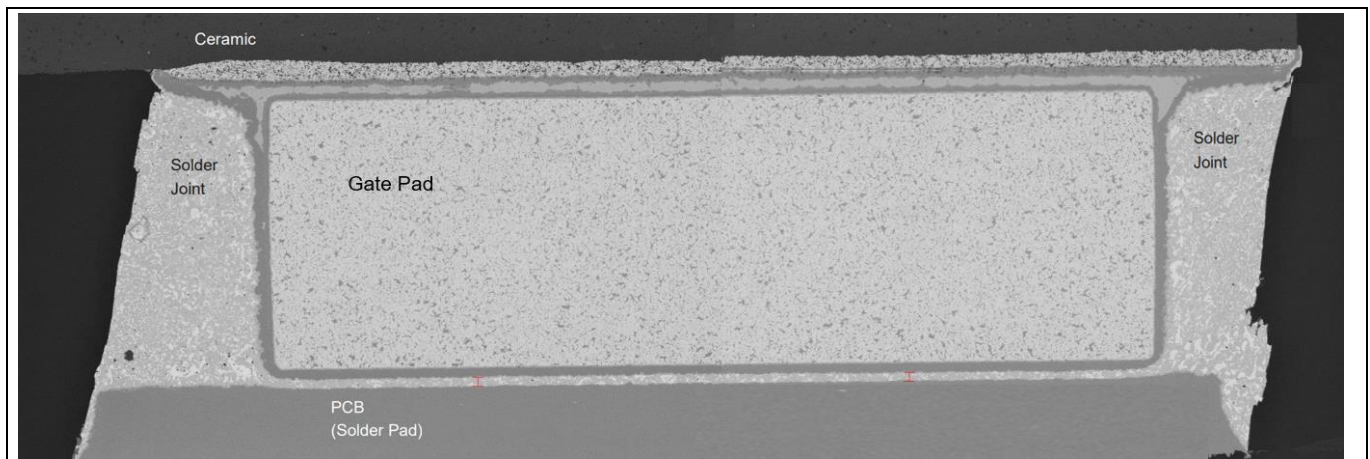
SEM cross section of SMD-0.2e gate pad bonded to PCB after 500 temp cycles. Bondline under pad appears to be crack-free
